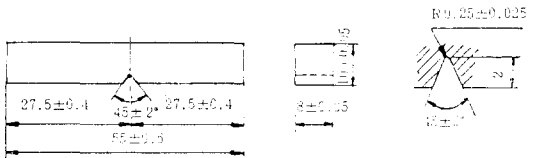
Charpy impact test specimen of in-air welds and underwater welded joints
